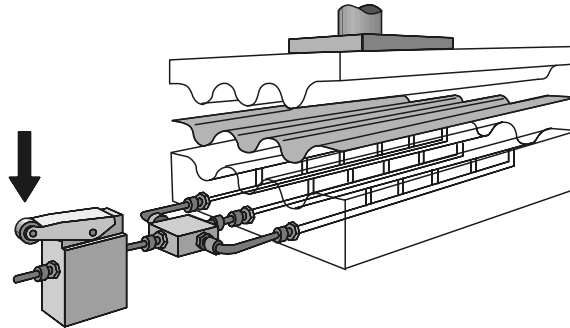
Auxiliary function for lifting of thin workpieces
